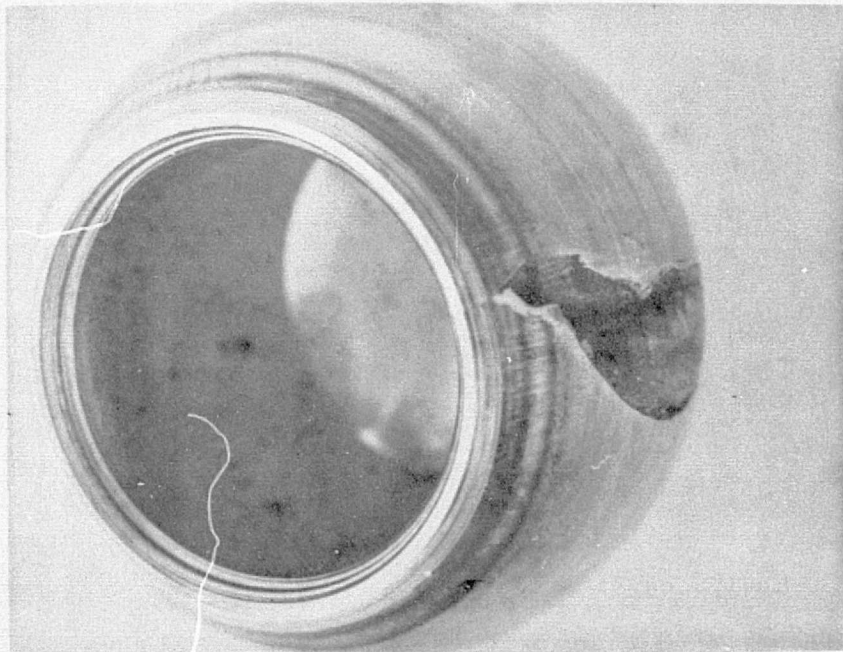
Design D Ball No. 60, Showing Fractured Carburized Ball.
